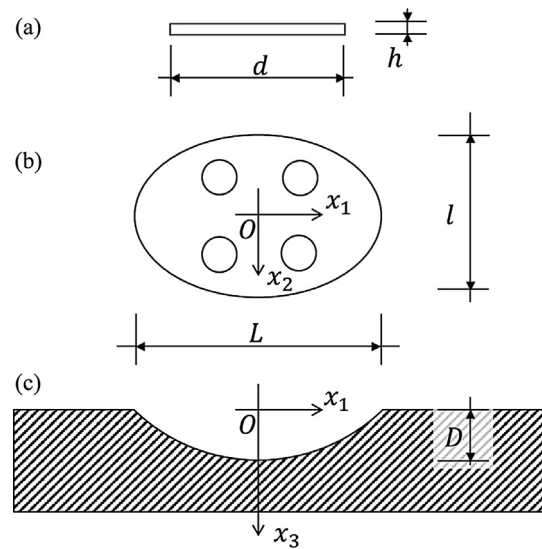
(a) A circular miniature specimen for Small Punch (SP) tests; (b) a typical removed sample with visualization of SP specimens to be extracted; (c) a cross section of the sample cavity. Visualized in (b) and (c) are the lengths l , L and D , which govern the geometry of sample and cavity according to Eq. (1).
